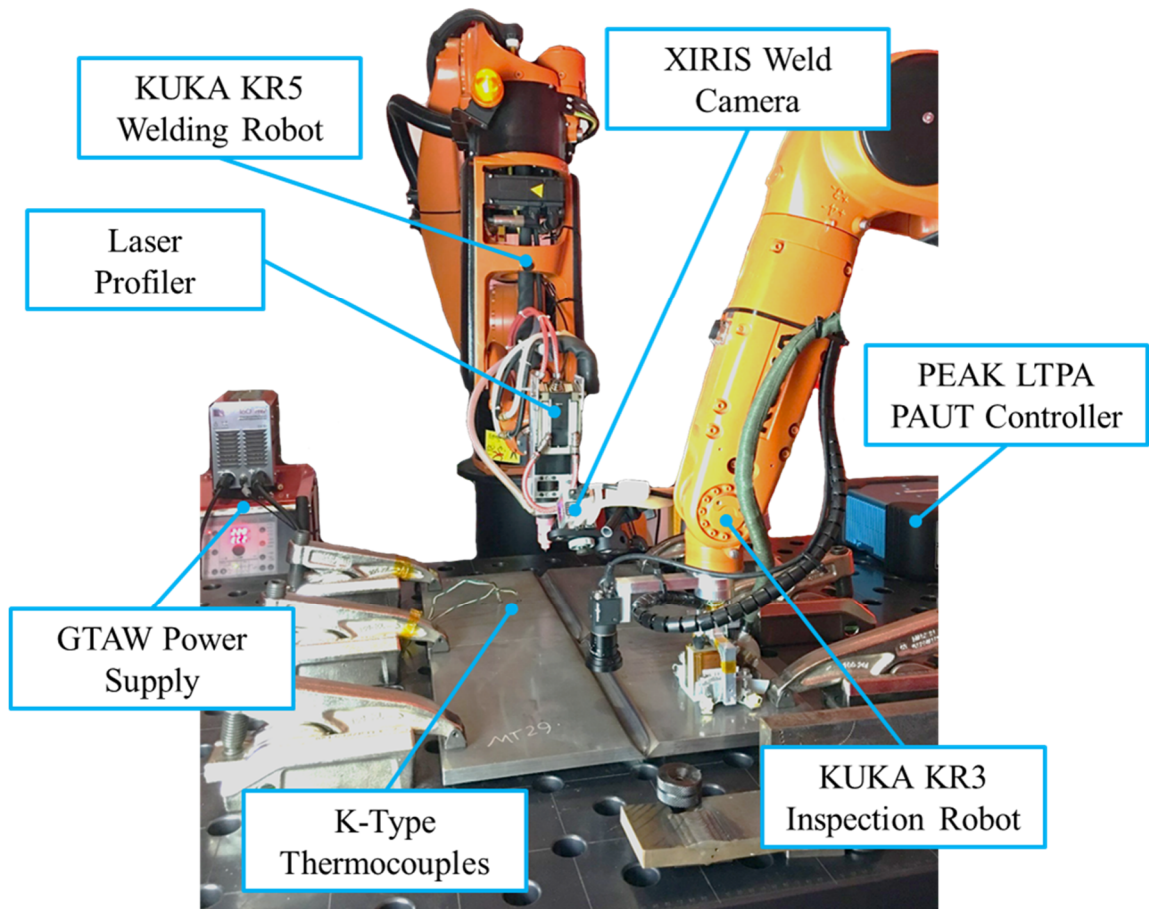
Robotic welding cell hardware showing robotic welding head with additional laser profiler and HDR camera, GTAW power supply, thermocouple attachment for temperature monitoring and NDT robotic deployment.
